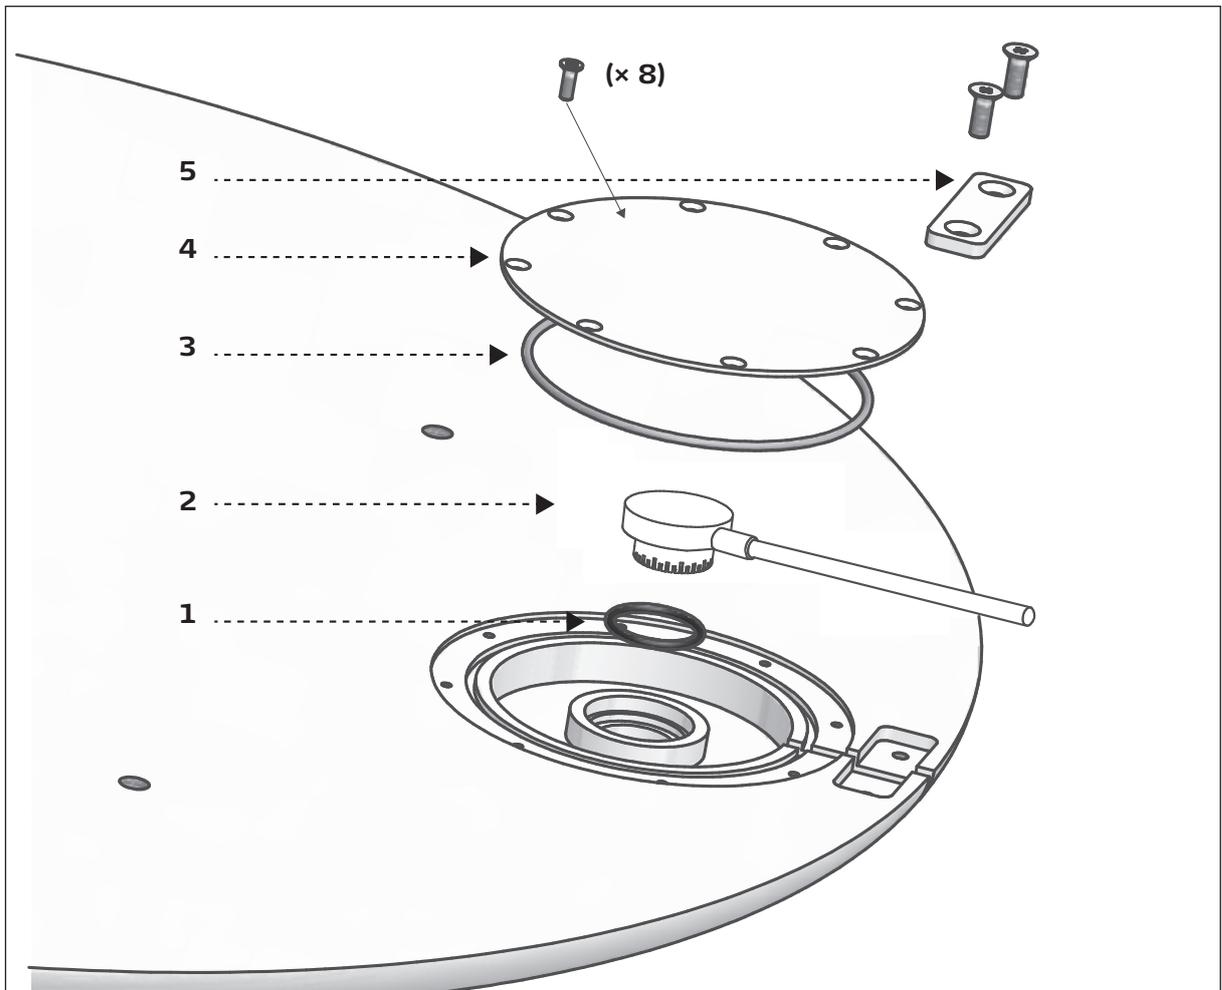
A view of the order for assembling the parts of the 67AX/67AD.
